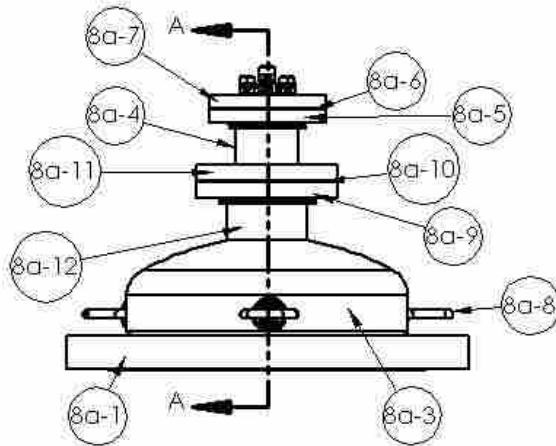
Drawing of Bottom of Reactor with Refractory Assembly
